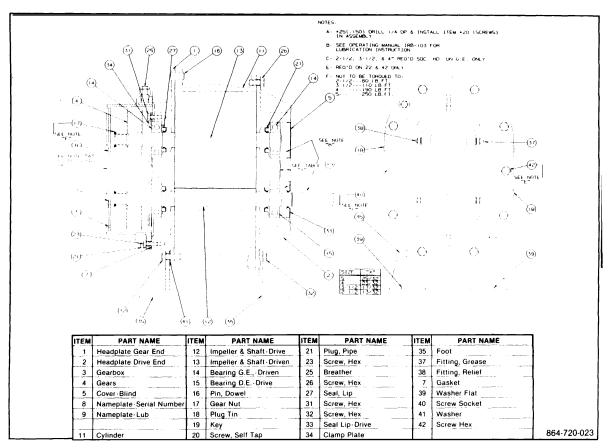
Dimensional Assembly of UNIVERSAL RAI® Blower 2 1/2"-5" Gear Diameter) page 3 - 816
